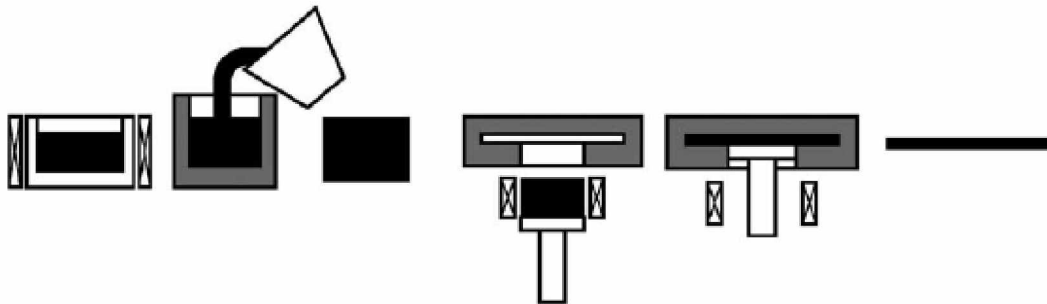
Schematic illustration of the thixoforming process using low superheat casting [32]
